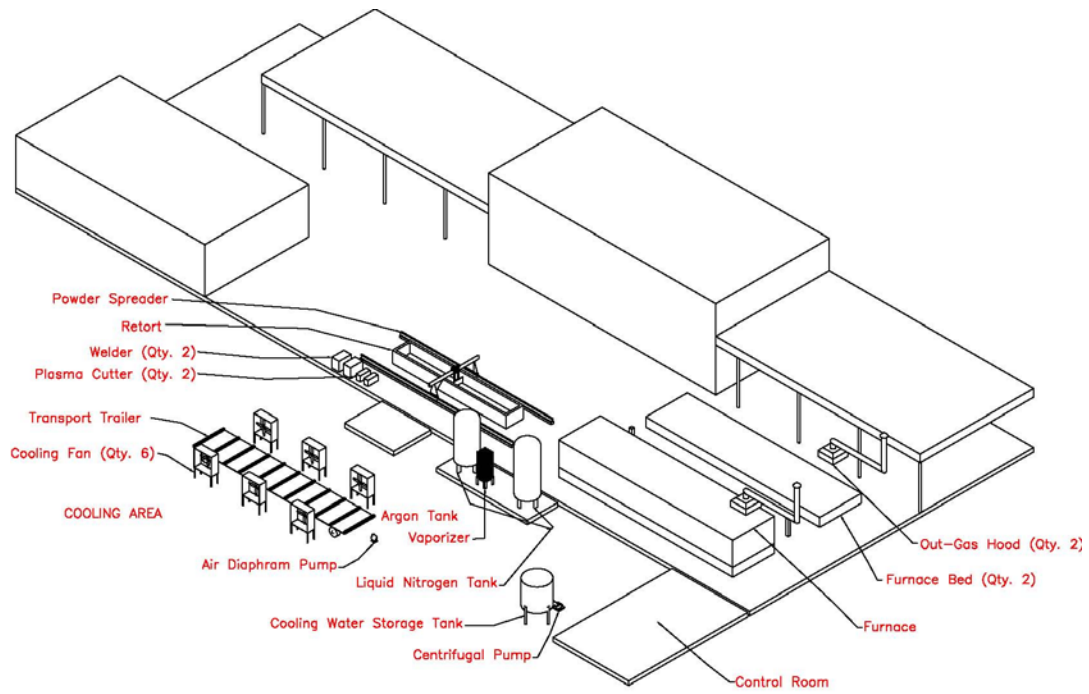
Equipment selection and layout of tube internal diffusion coating area.
